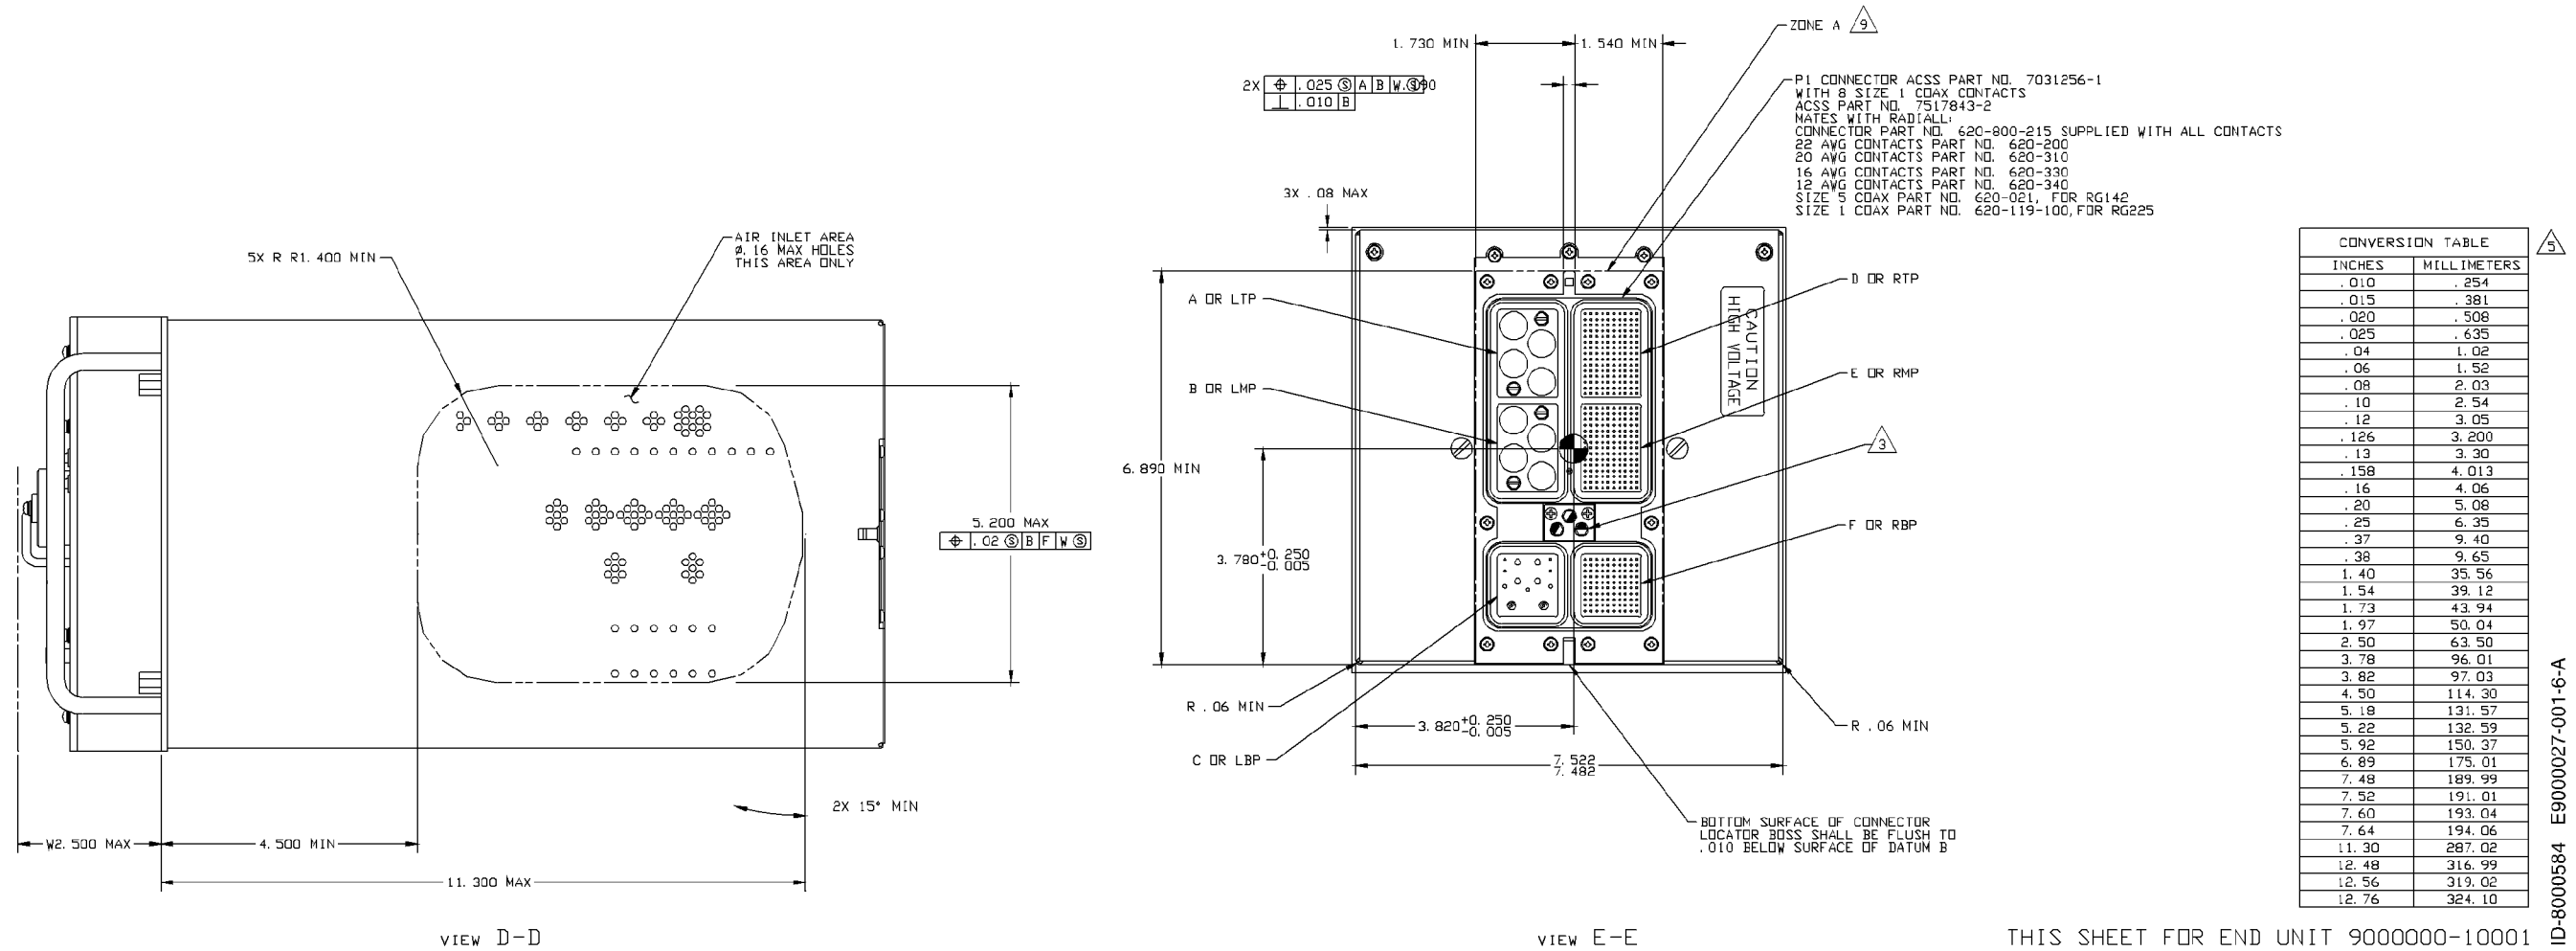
(Sheet 3). TT-950/952 T²CAS Computer Unit Outline and Installation Drawing
